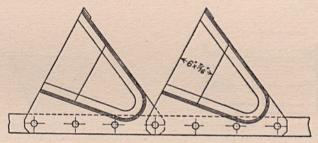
SMUDGE ELEVATOR BUCKETS.
